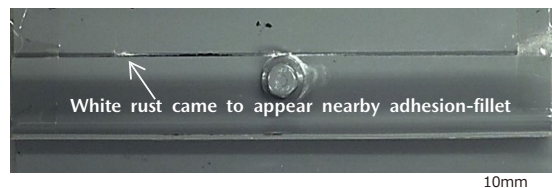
Cosmetic Corrosion at Joint of Aluminum Die-Cast Plate and GA Steel Plate
